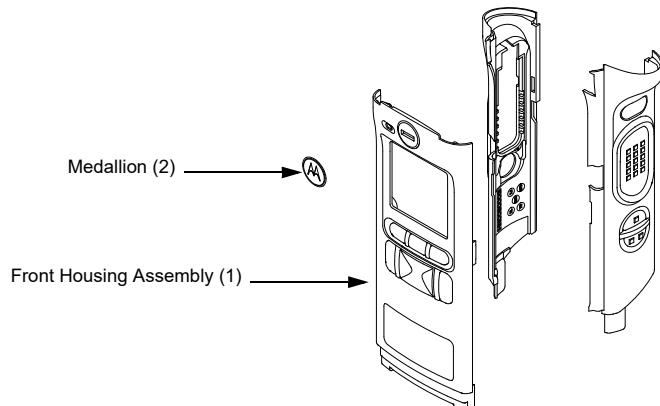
Main Housing Assembly (Dual Display Version, Limited Keypad)
